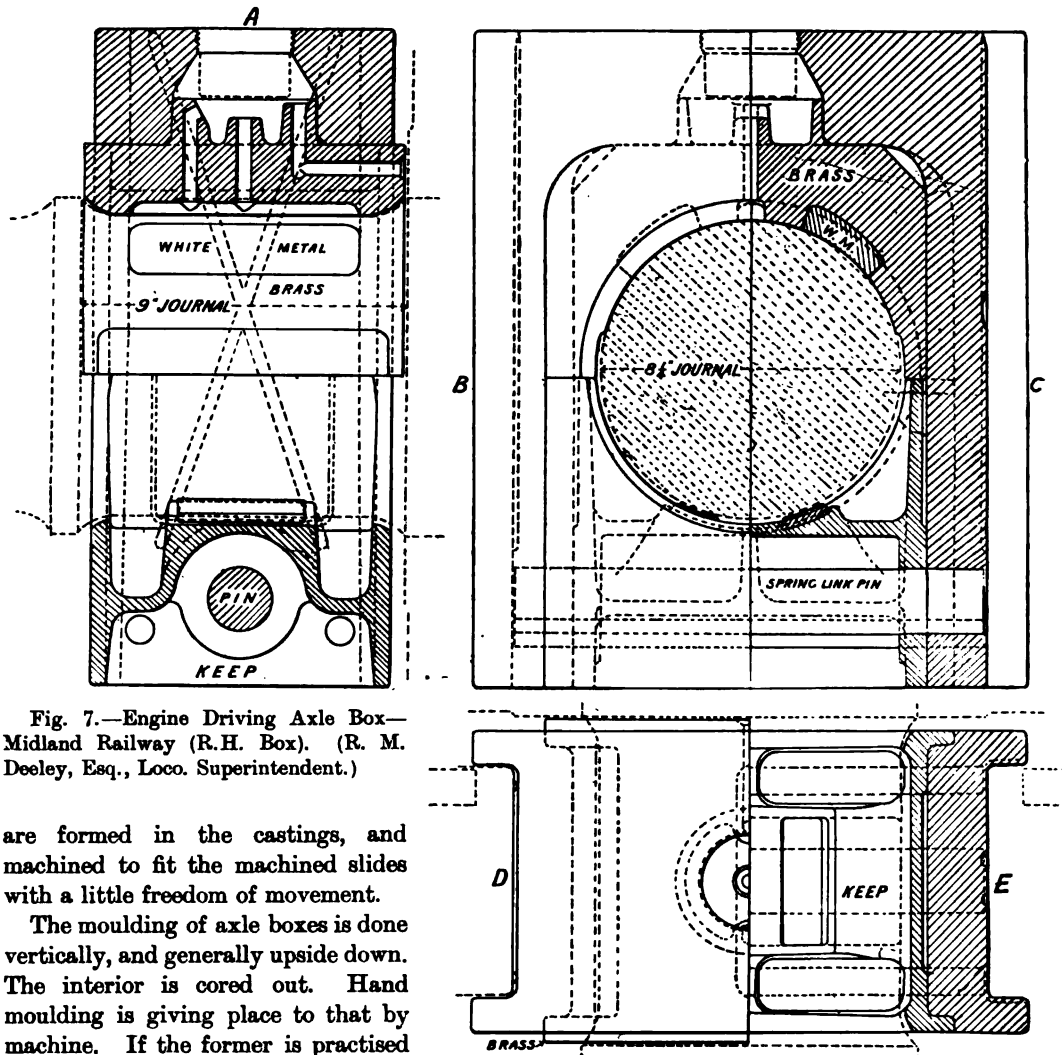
Engine Driving Axle Box—Midland Railway (R.H. Box). (R. M. Deeley, Esq., Loco. Superintendent.)
